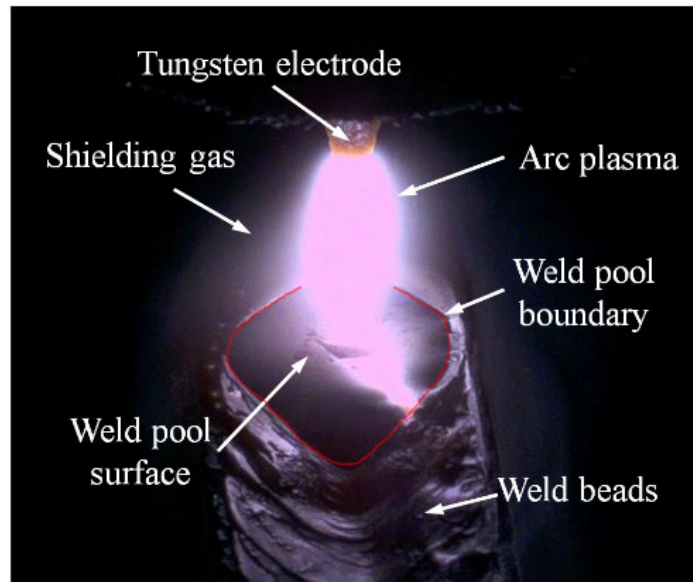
Weld pool image captured by a ²weld pool monitoring setup
